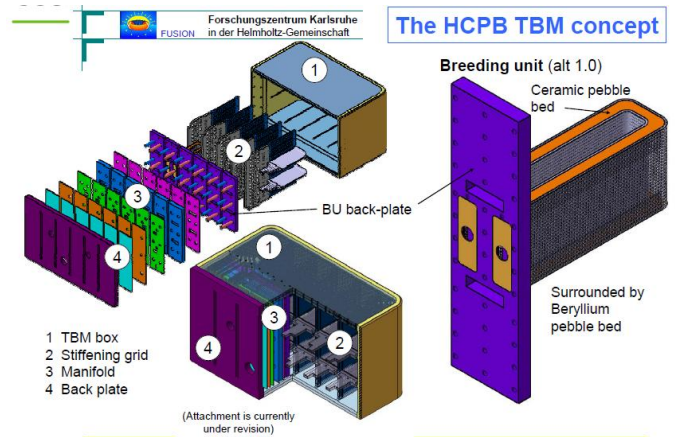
Exploded view of the HCPB-TBM in its horizontal arrangement
